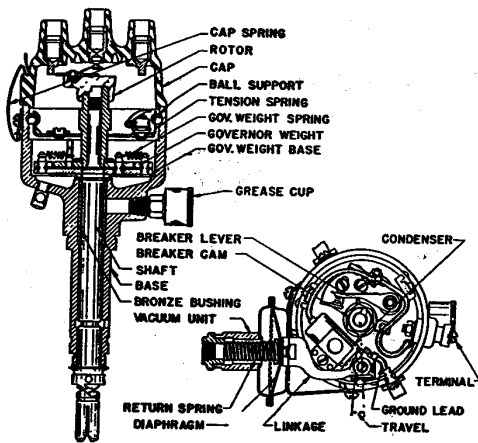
Ignition timer - distributor. Left: Sectional view from side. Right: View of timer from top, cap removed. Vacuum unit in sectional view.
